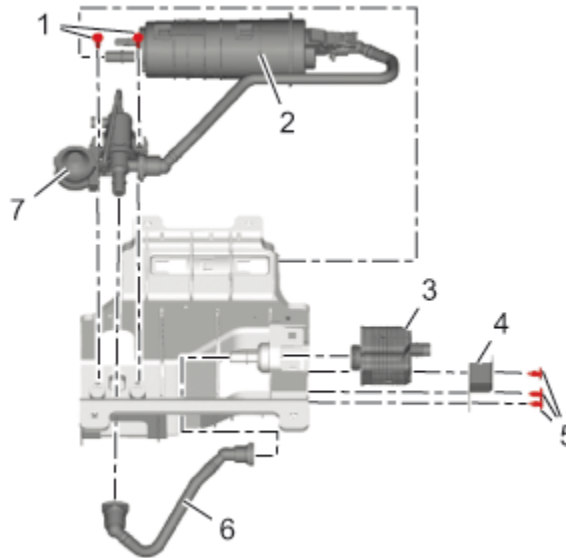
Evaporative Emission Canister And Vacuum Leak Pump Components
